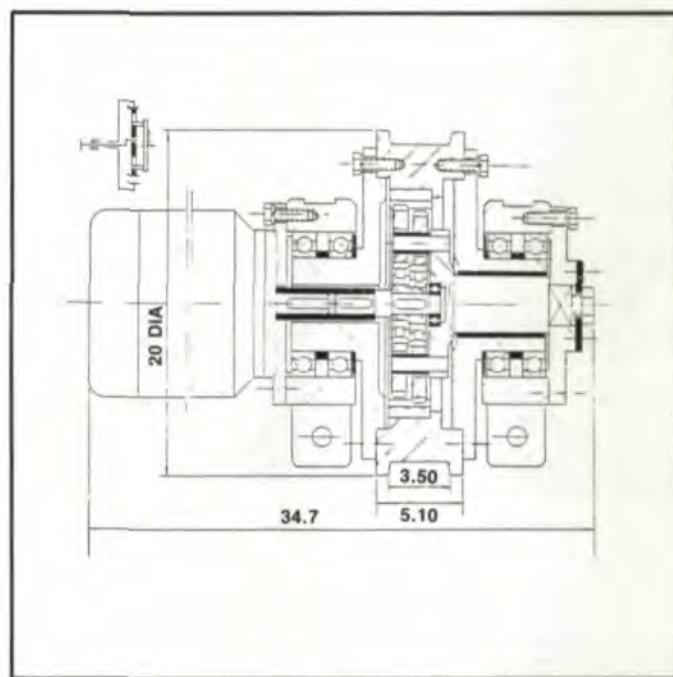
A KHV reducer built inside a wheel with H as input and ring gear as output.
